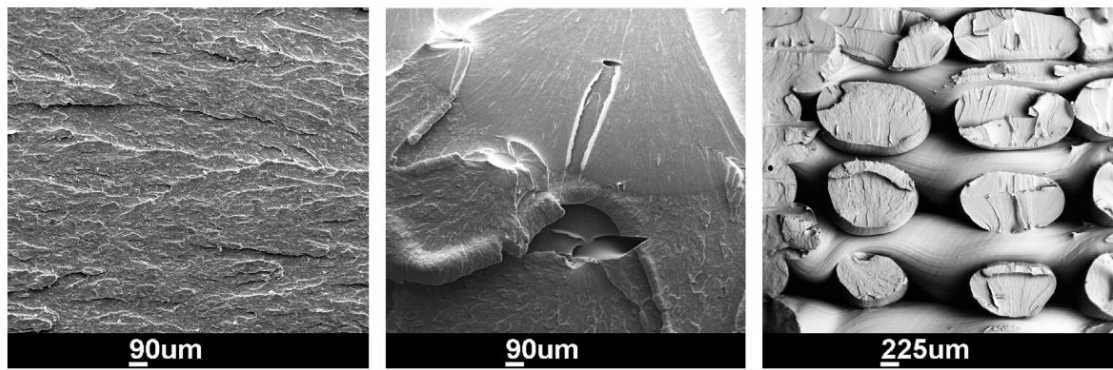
SEM of the fracture surface of tensile samples in ABS of injection moulded, printed part with negative gap and positive gap.
